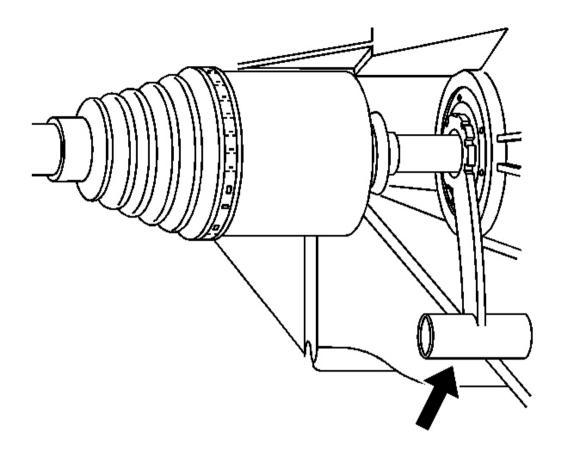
Drive Axles & Transaxle Courtesy of GENERAL MOTORS CORP.
